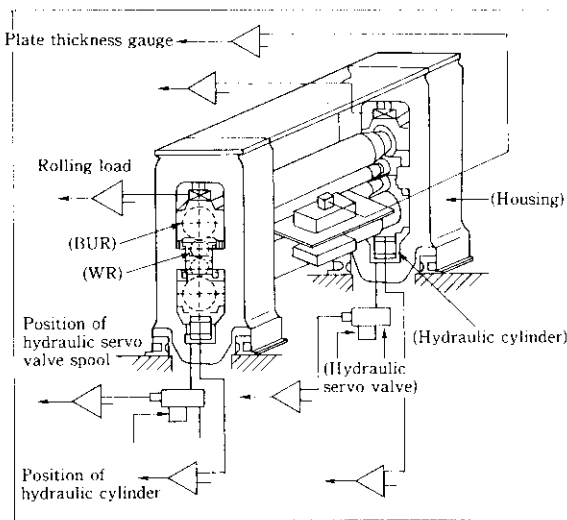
Overview of hydraulic reduction equipment and configuration of detectors
